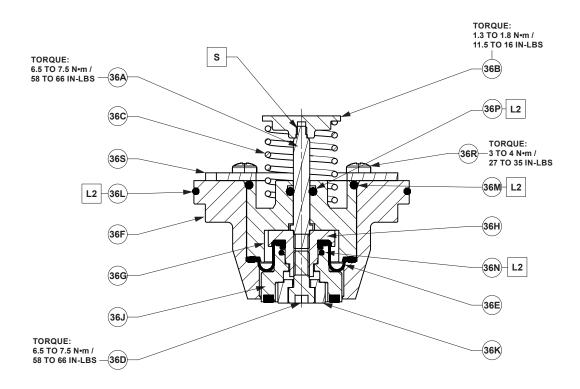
CSB600 and CSB620 Series Regulator Assembly
